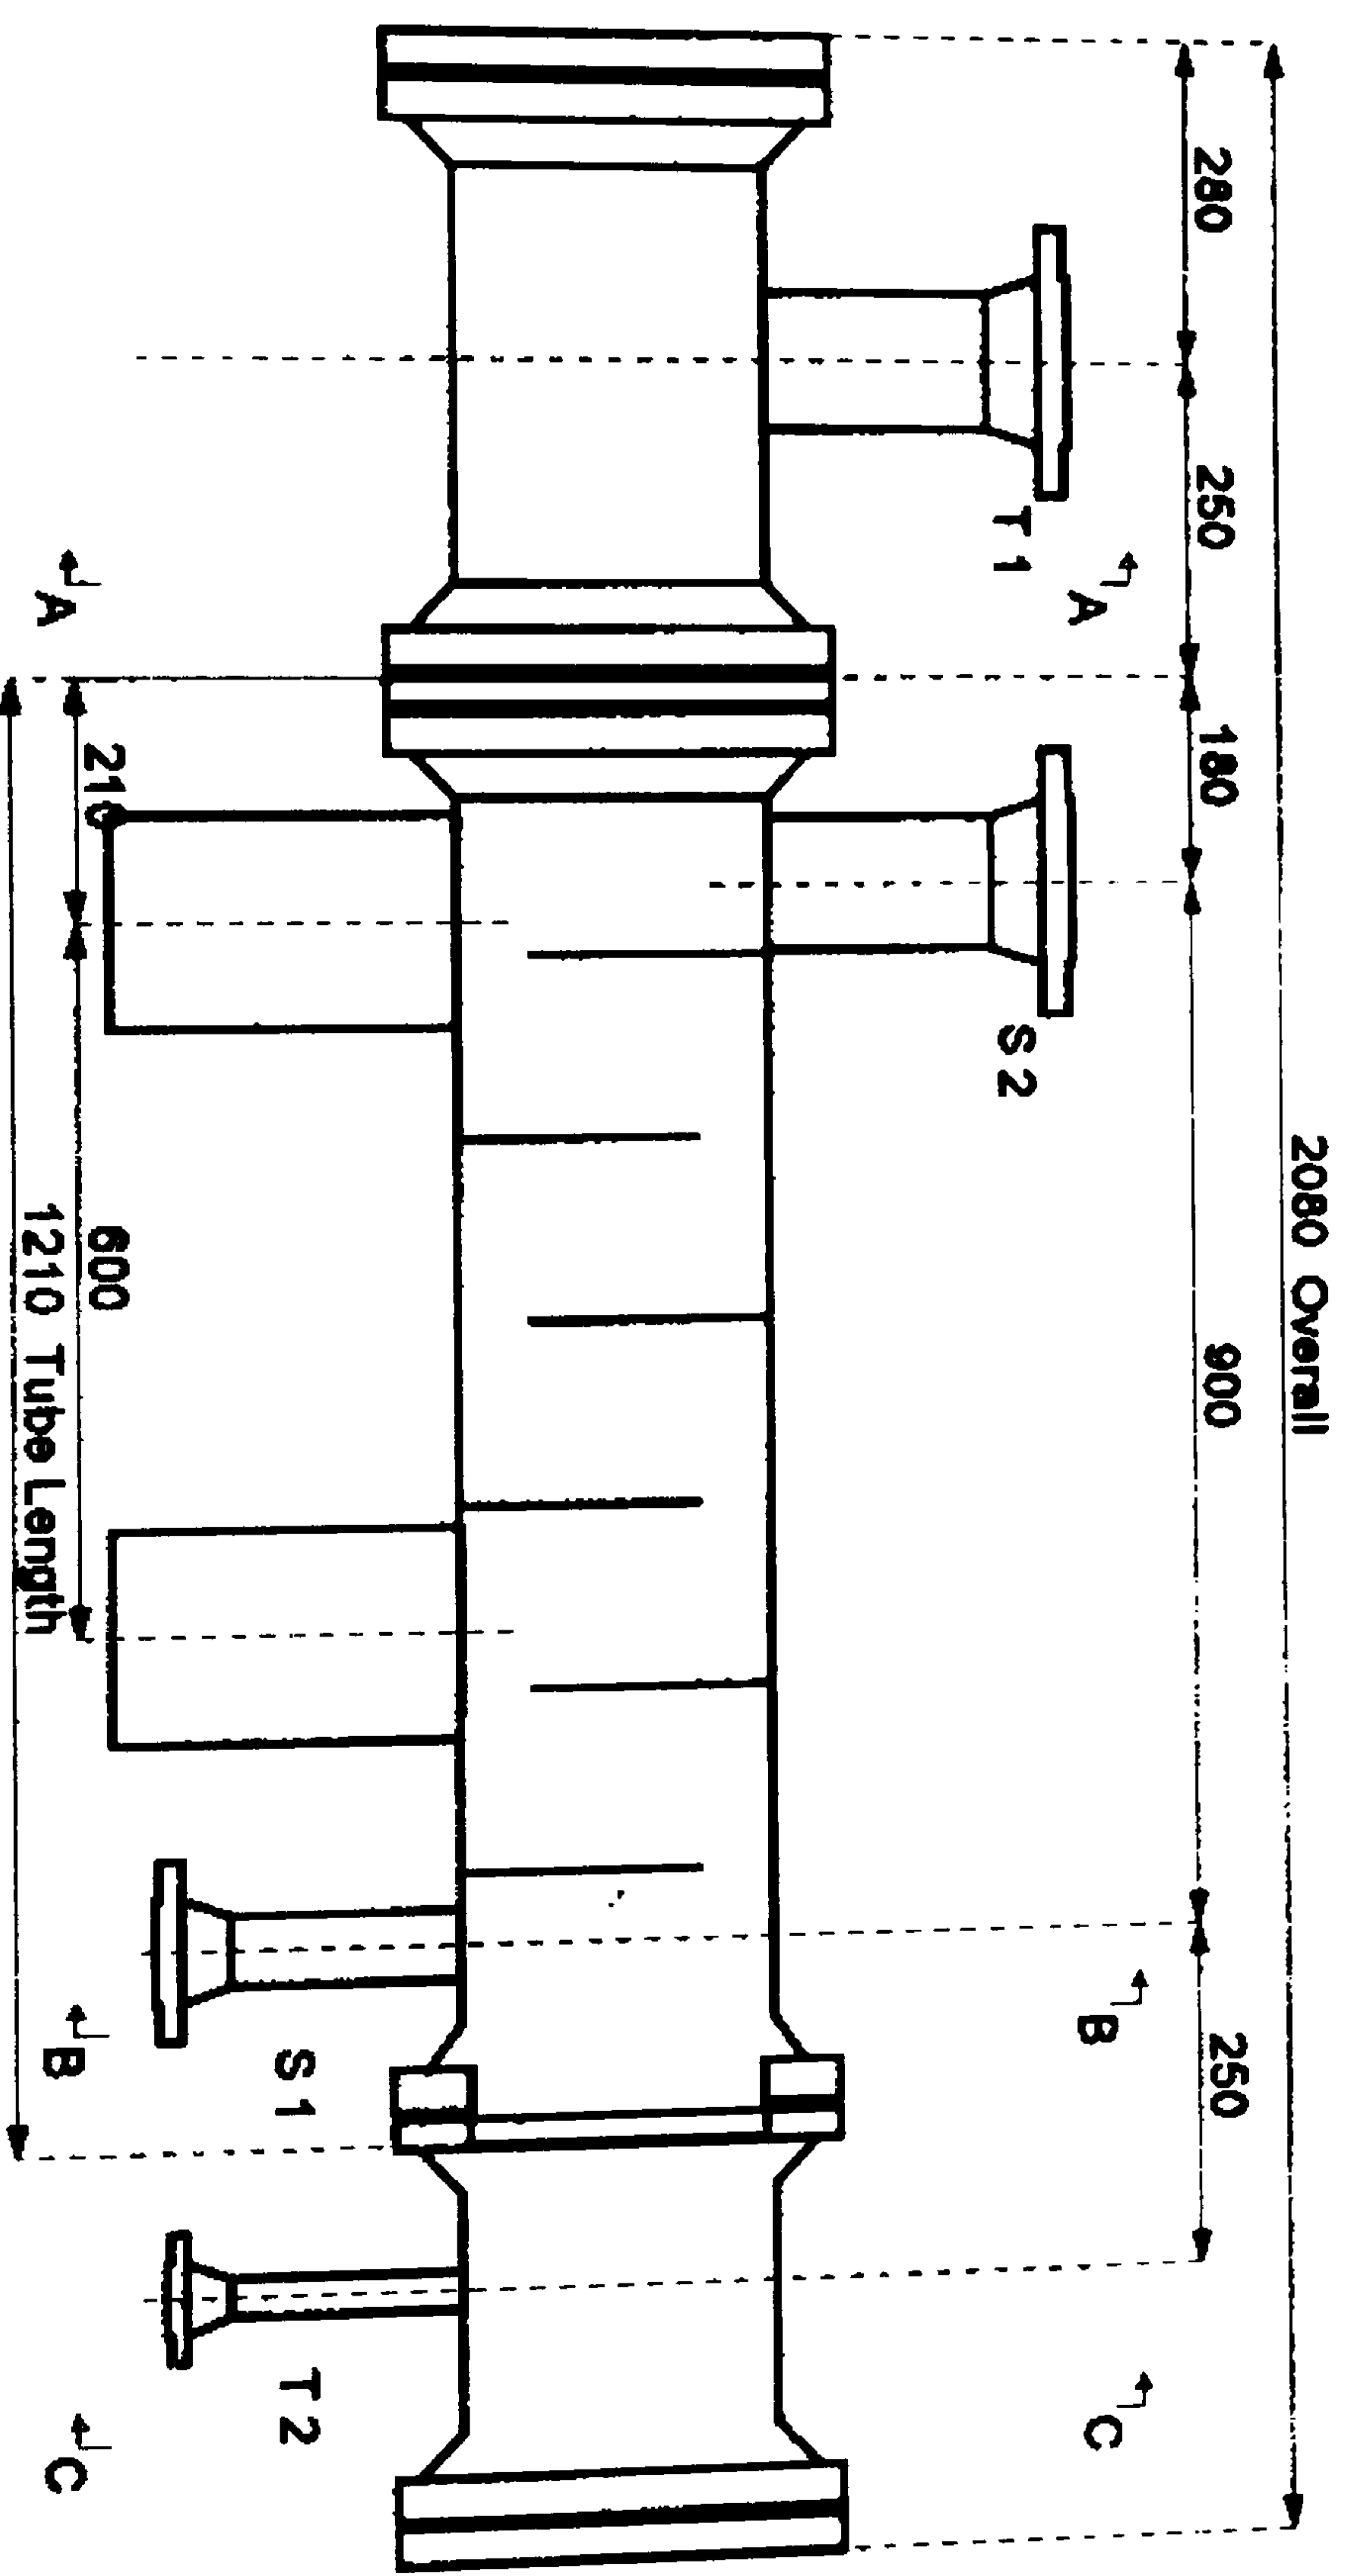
Test Evaporator Dimensions (Test 1 baffle cut)
